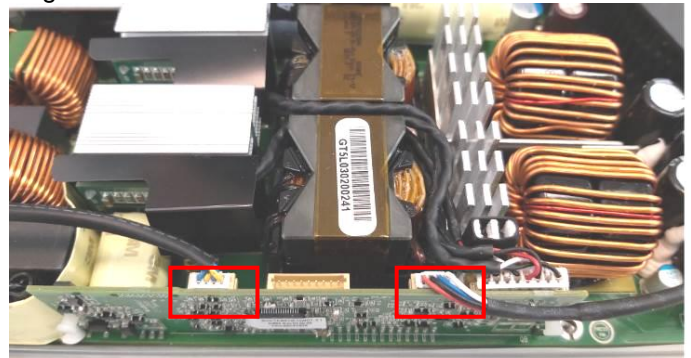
Take out PCBA with AC socket cable from bottom chassis.
